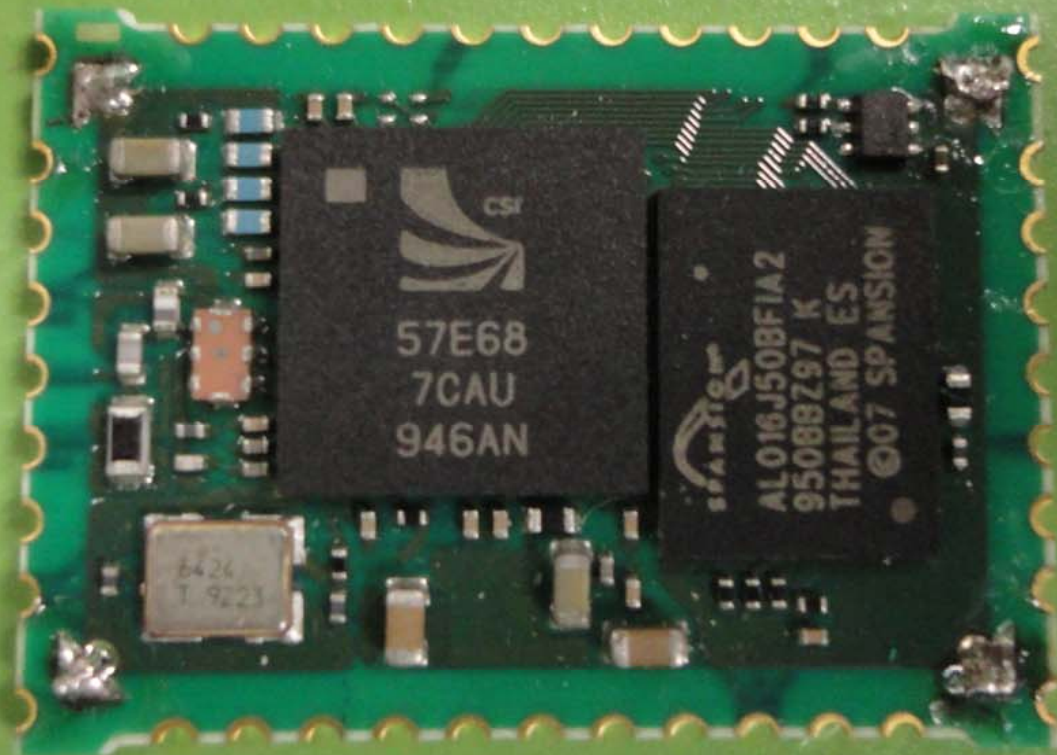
Appearance of Bluetooth Block (Solder Side)
